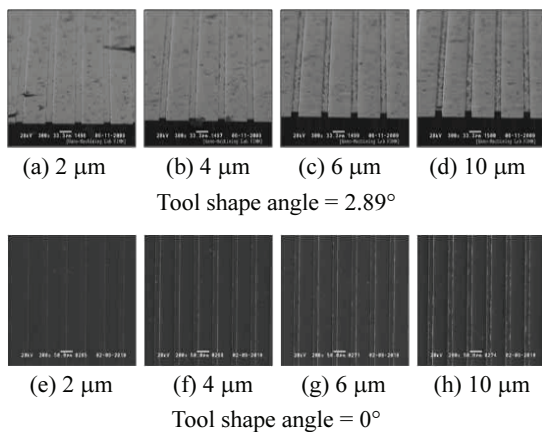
Comparison of machining surface with tool shape angle and initial cutting depths
